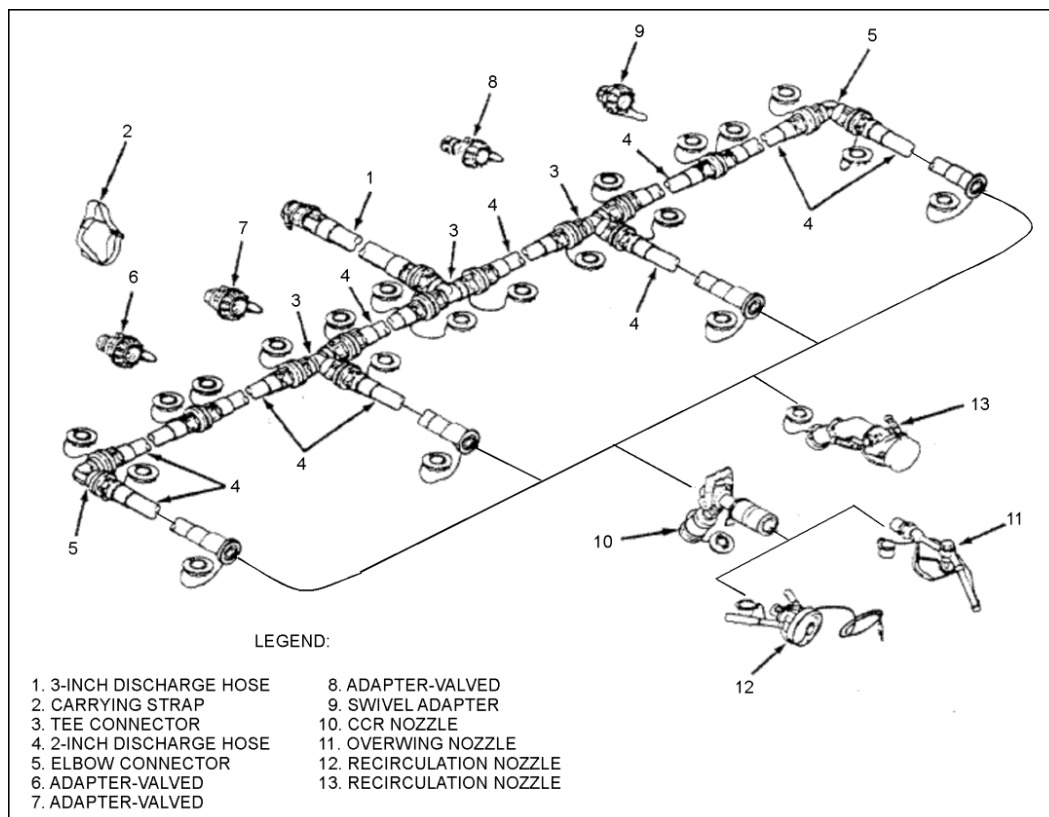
Heavy expanded mobile tactical truck tanker refueling system components and layout
